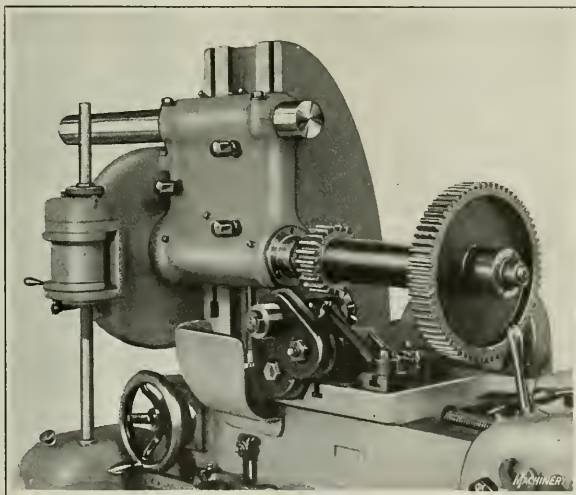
Gear-cutting Machine equipped with Special Attachment for cutting Quill Gears
